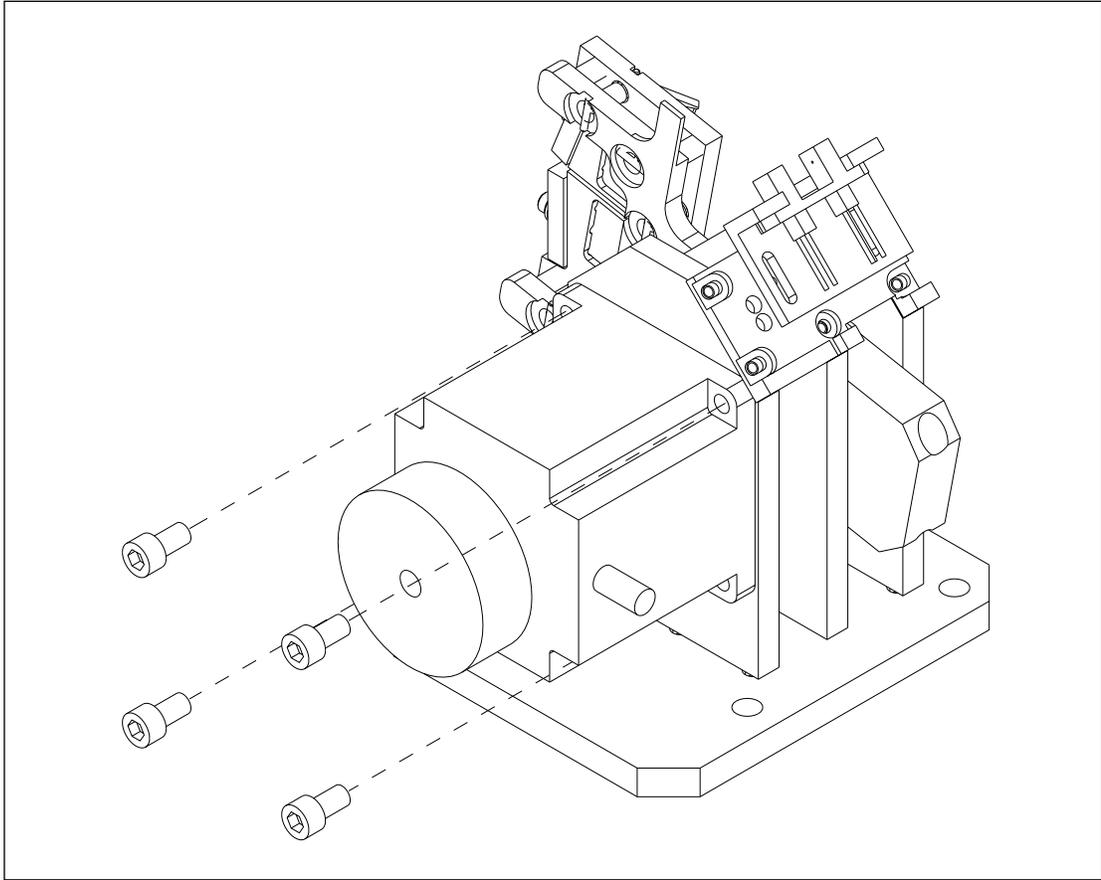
Primary Beamsplitter Changer Drive Motor Mounting.
